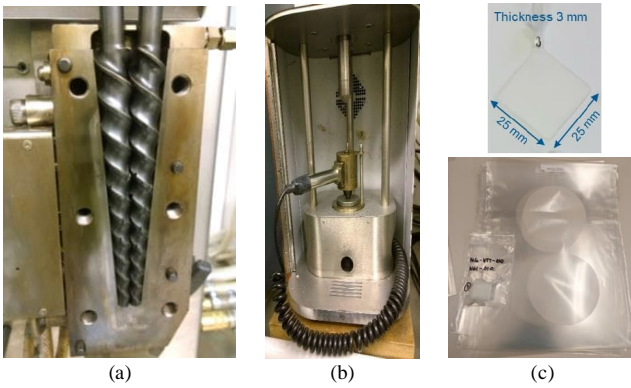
Mini-scale compounding and manufacturing of flat specimens for characterization: (a) mini-scale twin-screw extruder, (b) injection moulding, (c) injection moulded specimen before hot-pressing (small specimens) and final hot-pressed flat specimens (large specimens).
